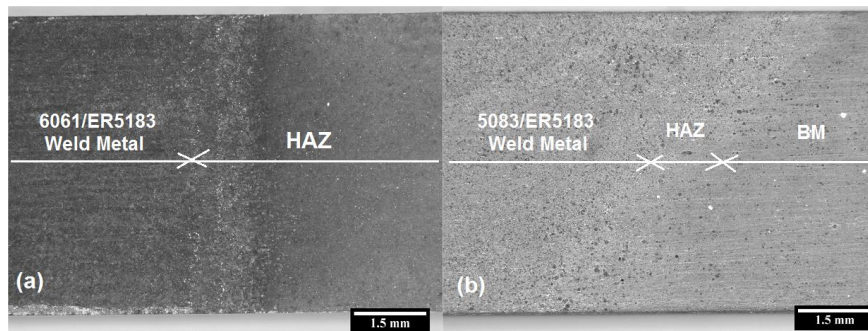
Pitting corrosion in the HAZ after immersion in 3.5%NaCl for 60 days: (a) 6061 welded with ER5183; and (b) 5083 welded with ER5183.
